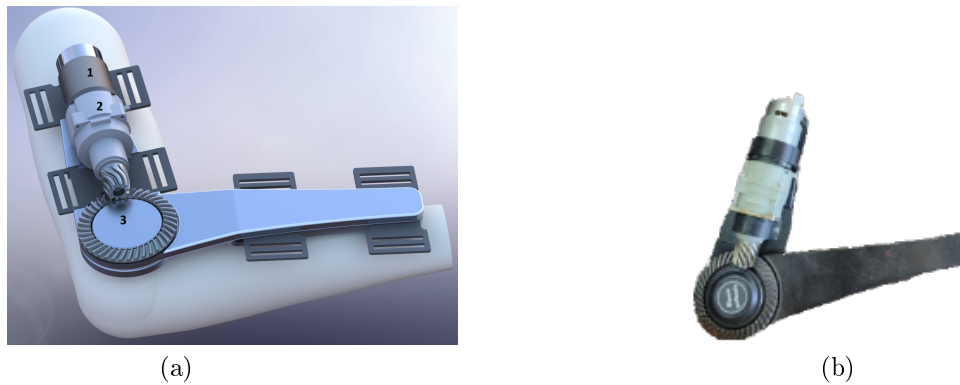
Design of the orthosis: (a) Model of orthosis: 1 – motor, 2 – planetary gearbox, 3 – bevel gear; (b) Prototype of the orthosis
